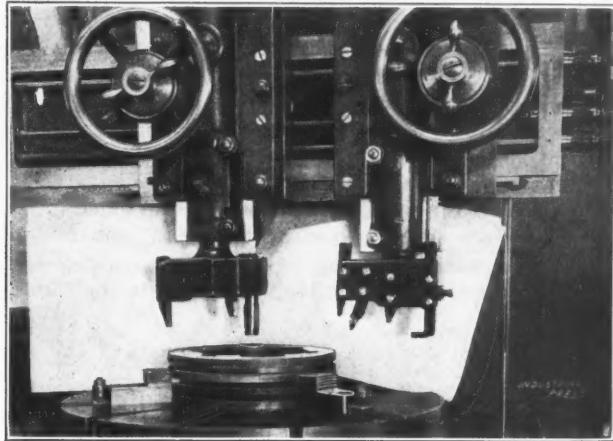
Showing Tools in Position for Reaming Hole, and Turning.
